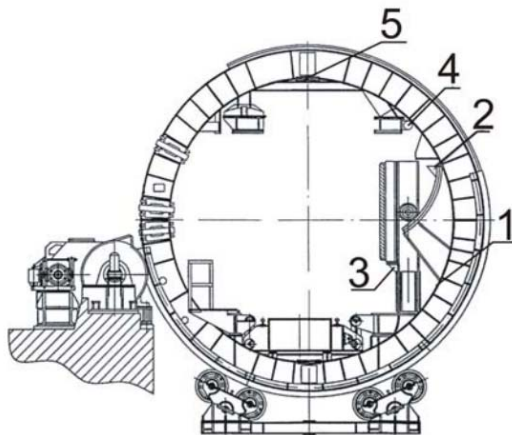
Rotary car dumper to unload the solid-bottom gondola cars:
